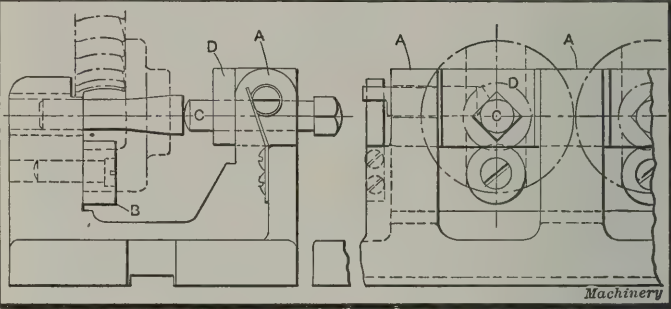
Milling Fixture used for Milling Tongue in Coupling in Fig. 3
